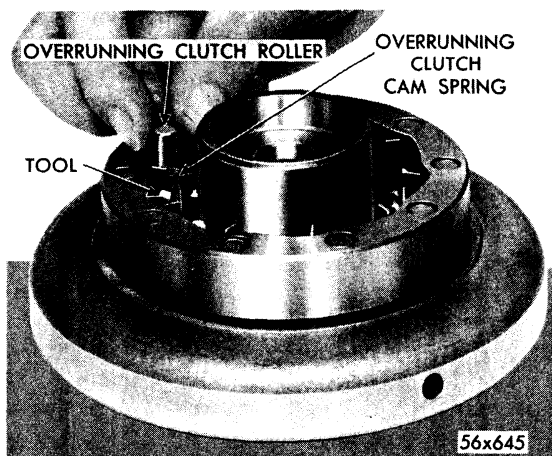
Installation of Overrunning Clutch Rollers and Springs in Intermediate Support and Cam Assembly
